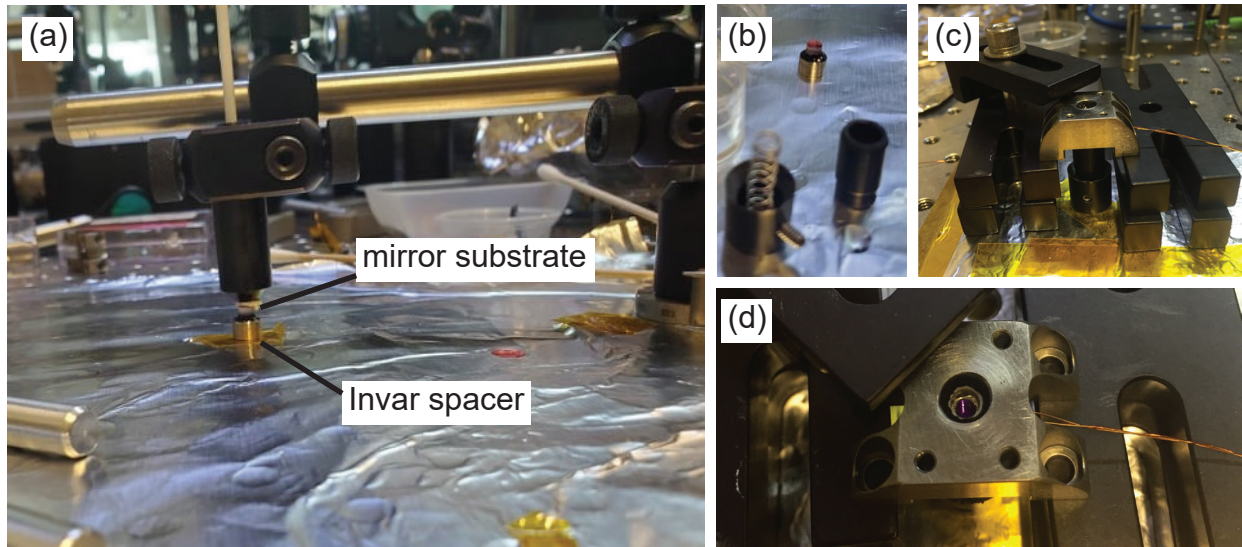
Epoxying the curved mirror. (a) Curved mirror clamped to Invar spacer for gluing. A fillet of epoxy can be seen in black joining the mirror substrate to the Invar spacer. (b) Spring clamp assembly used to the clamp Invar spacer and mirror assembly to the curved mirror holder. The epoxied mirror assembly can be seen at the top of the image. (c) Spring clamp assembly holding the mirror-spacer assembly to the curved mirror holder. (d) Epoxy joint between the Invar spacer and the curved mirror holder can be seen in the hole in the curved mirror holder.
